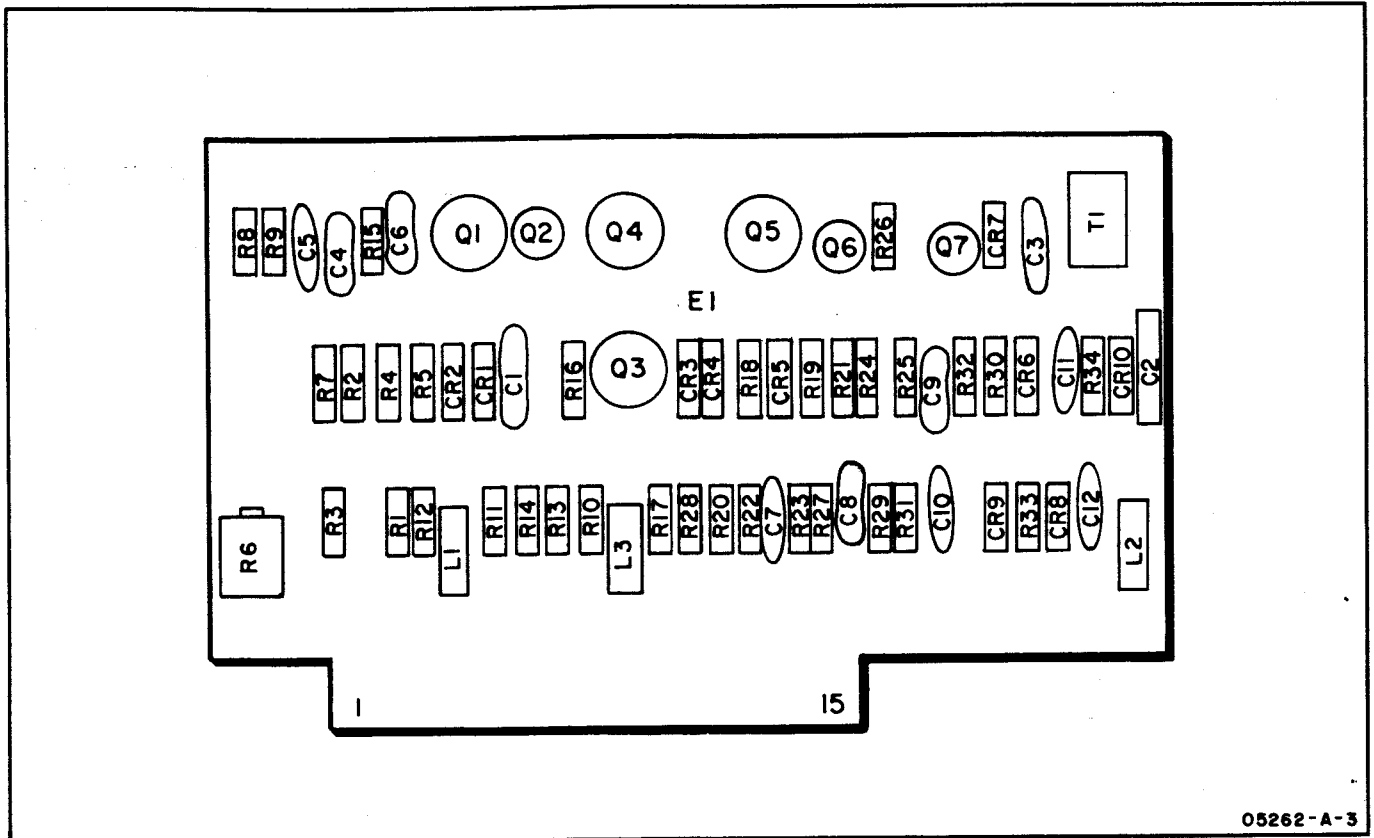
Component Location, Trigger Generator Assembly (A3, A4)
